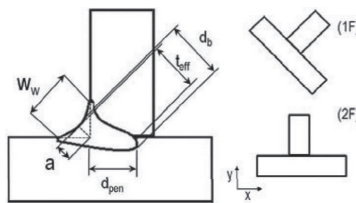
Schematic illustration of laser/HLAW welded fillet joint (left) and welding positions studied (right).
